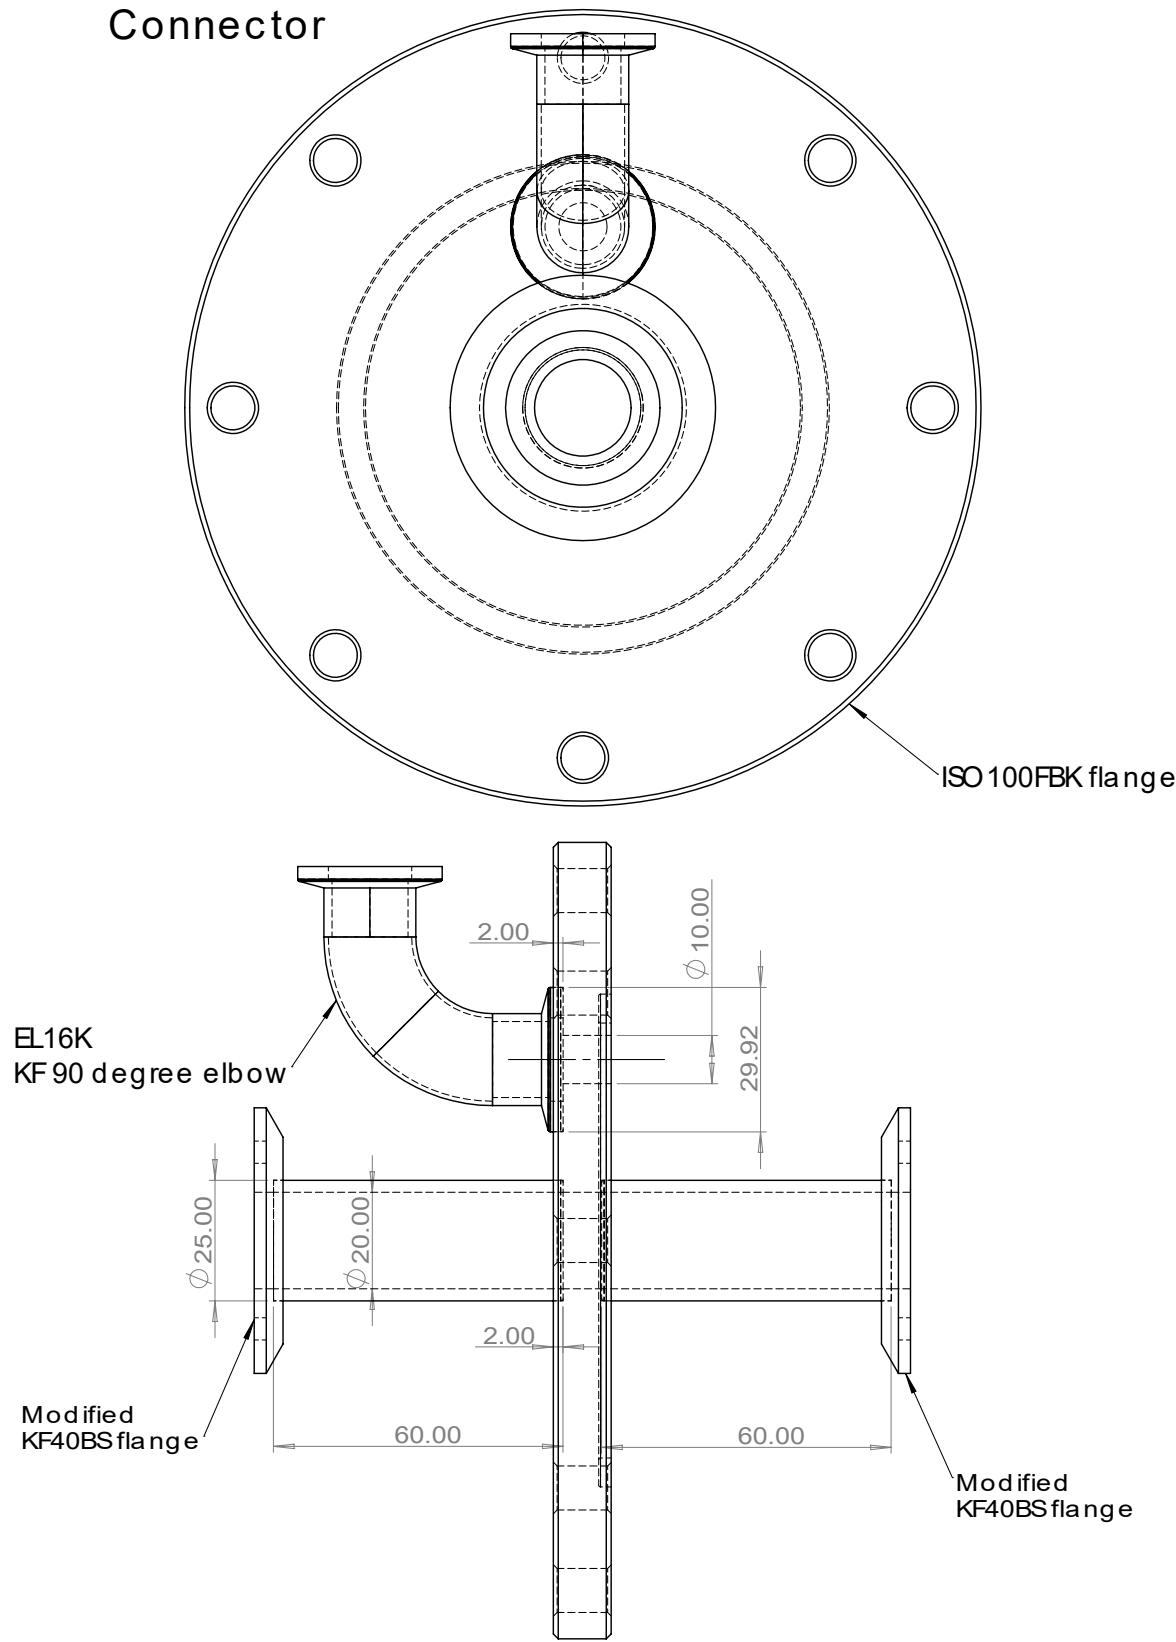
Design of the connector for linking the shock tube and the vacuum chamber.
